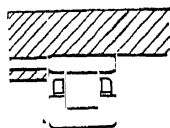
Holes drilled through a solid housing shoulder to enable an outer race to be pushed off.
